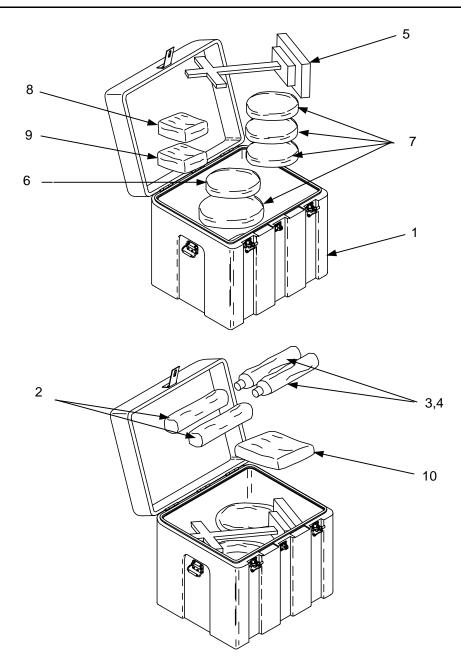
Footlocker No. 1 0023 00-(1 Blank)/2
